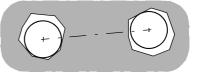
Assembly of a gauge compound of two cylinders with fixed diameters.
